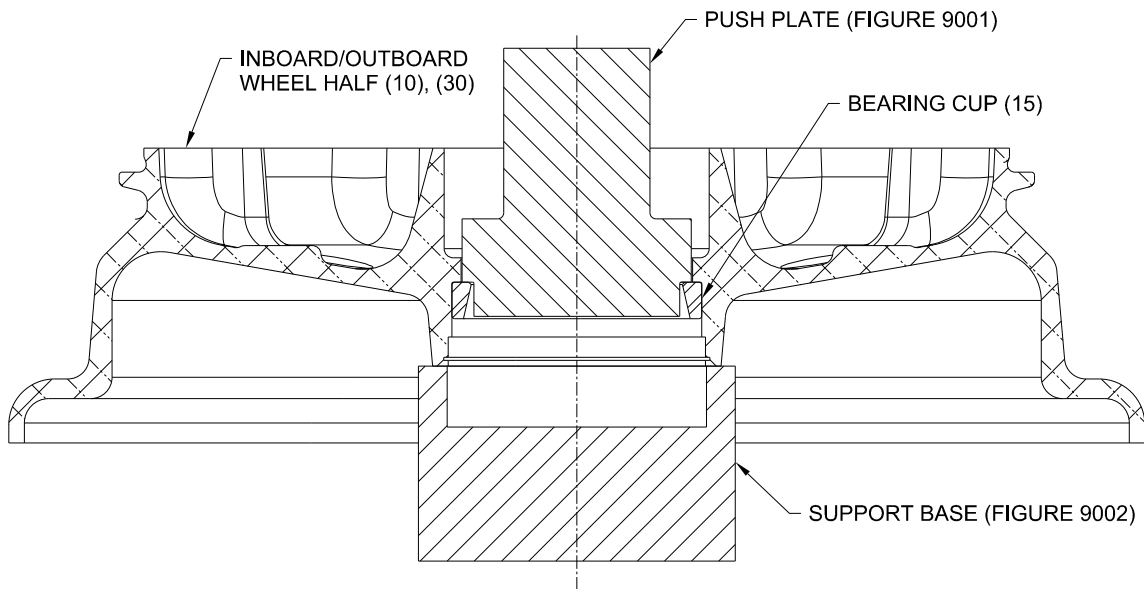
Remove the bearing cup – inboard/outboard wheel half (10), (30)
